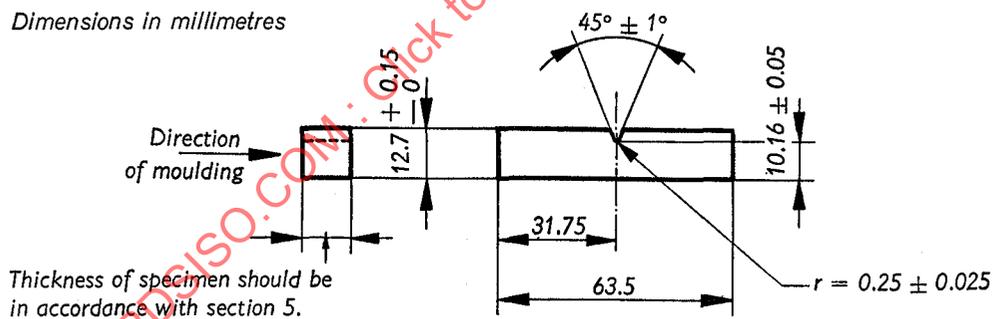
Specimen for Cantilever beam (Izod Type) impact machine
